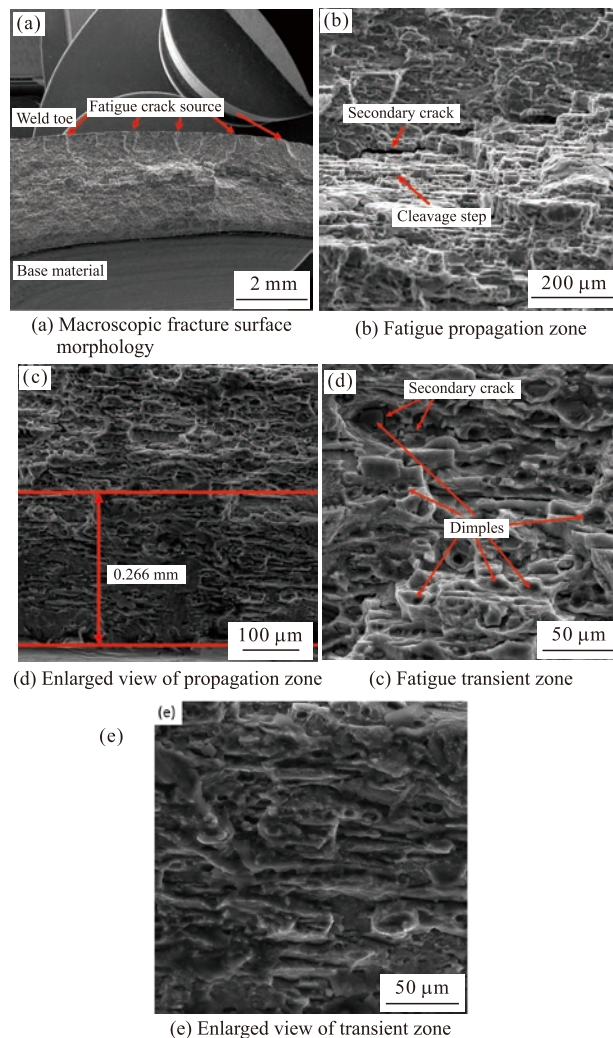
Fatigue fracture morphology of specimen Y02
